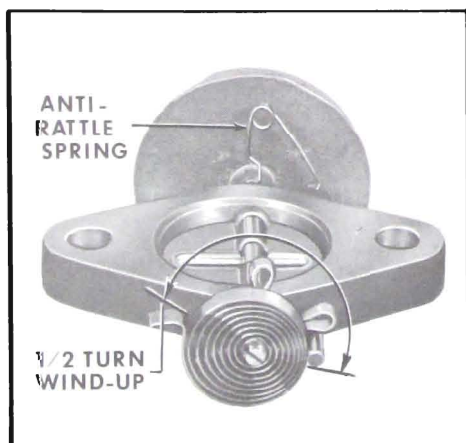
Manifold Valve Thermostat Wind-Up - 401 and 425 Engines
